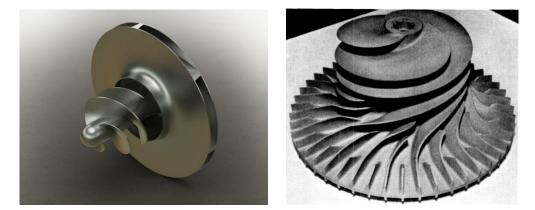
Inducer (bold black line) placed in front of impeller in centrifugal pump and photo of inducer [23]
